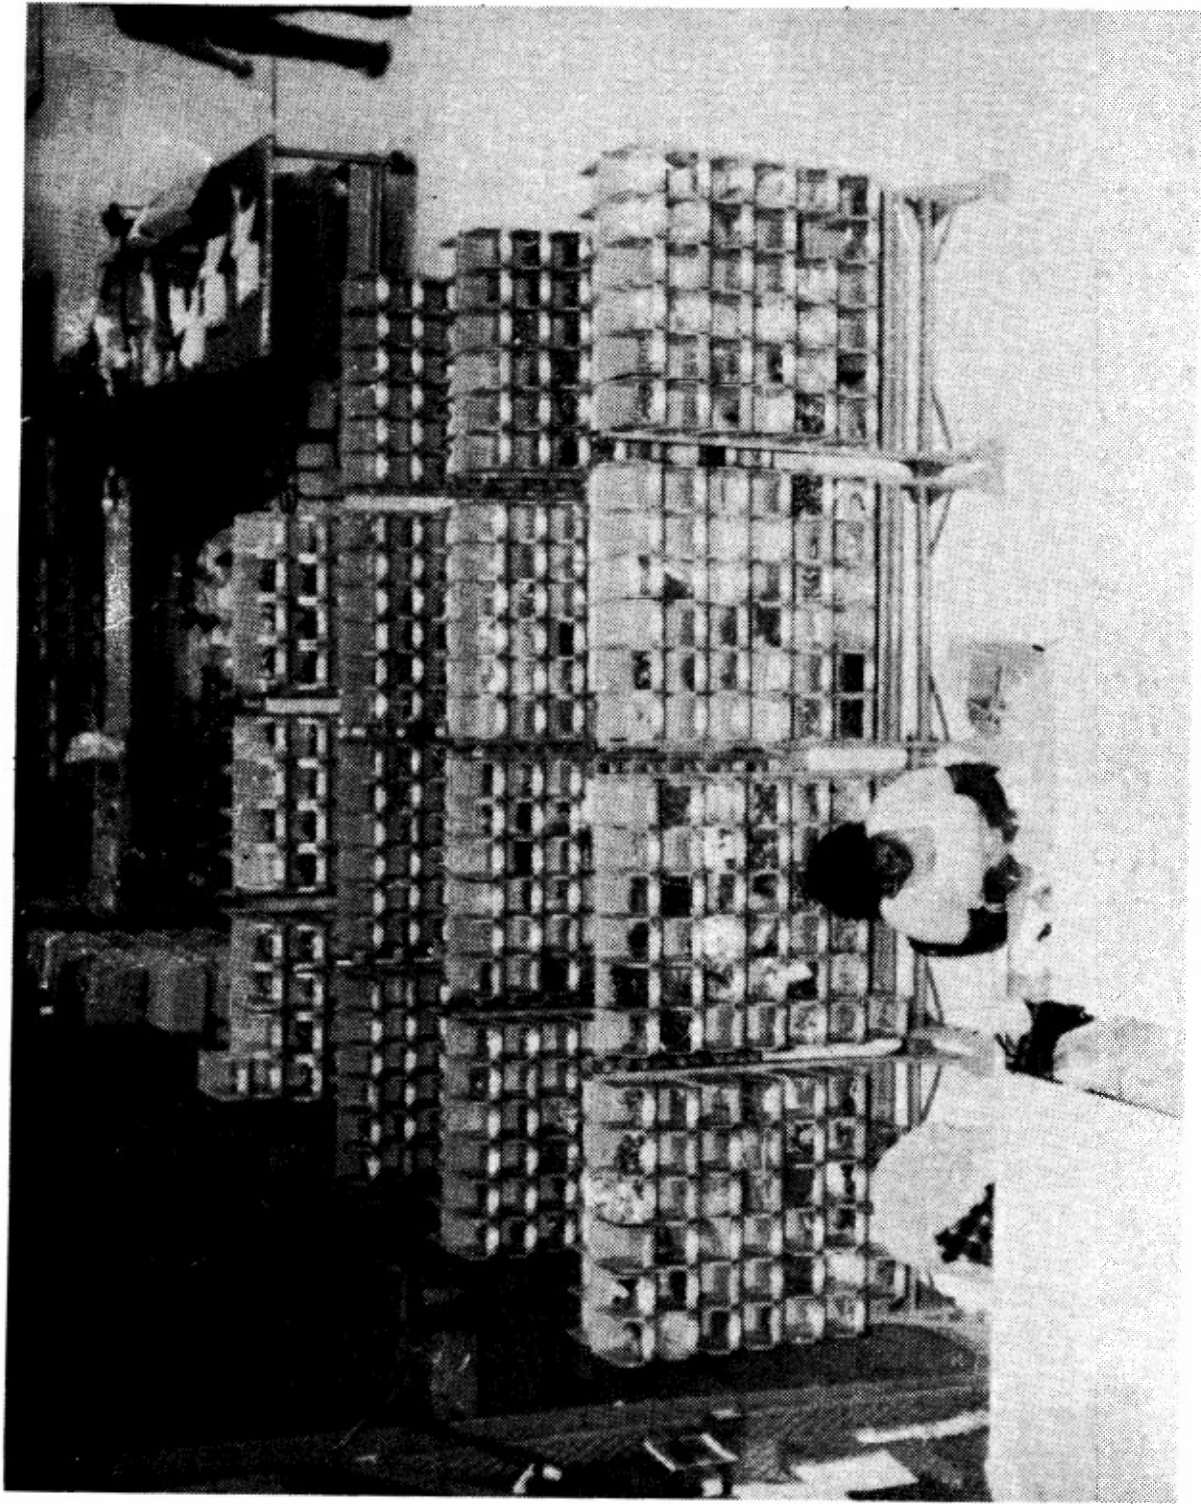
Another view of the disassembly area after GTST, showing the pre-expanded bins for hardware.
